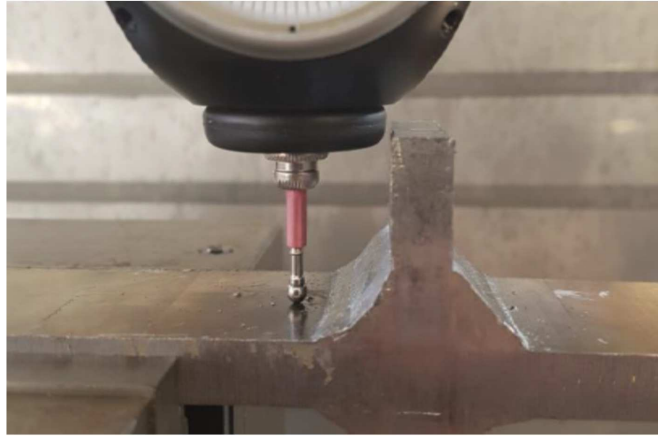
The measurement of the coordinated of point A, before the weld toe on the steel side [66].
